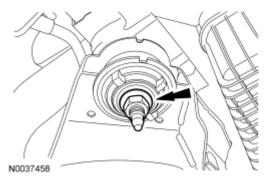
Locating Front Subframe Nuts Courtesy of FORD MOTOR CO.
